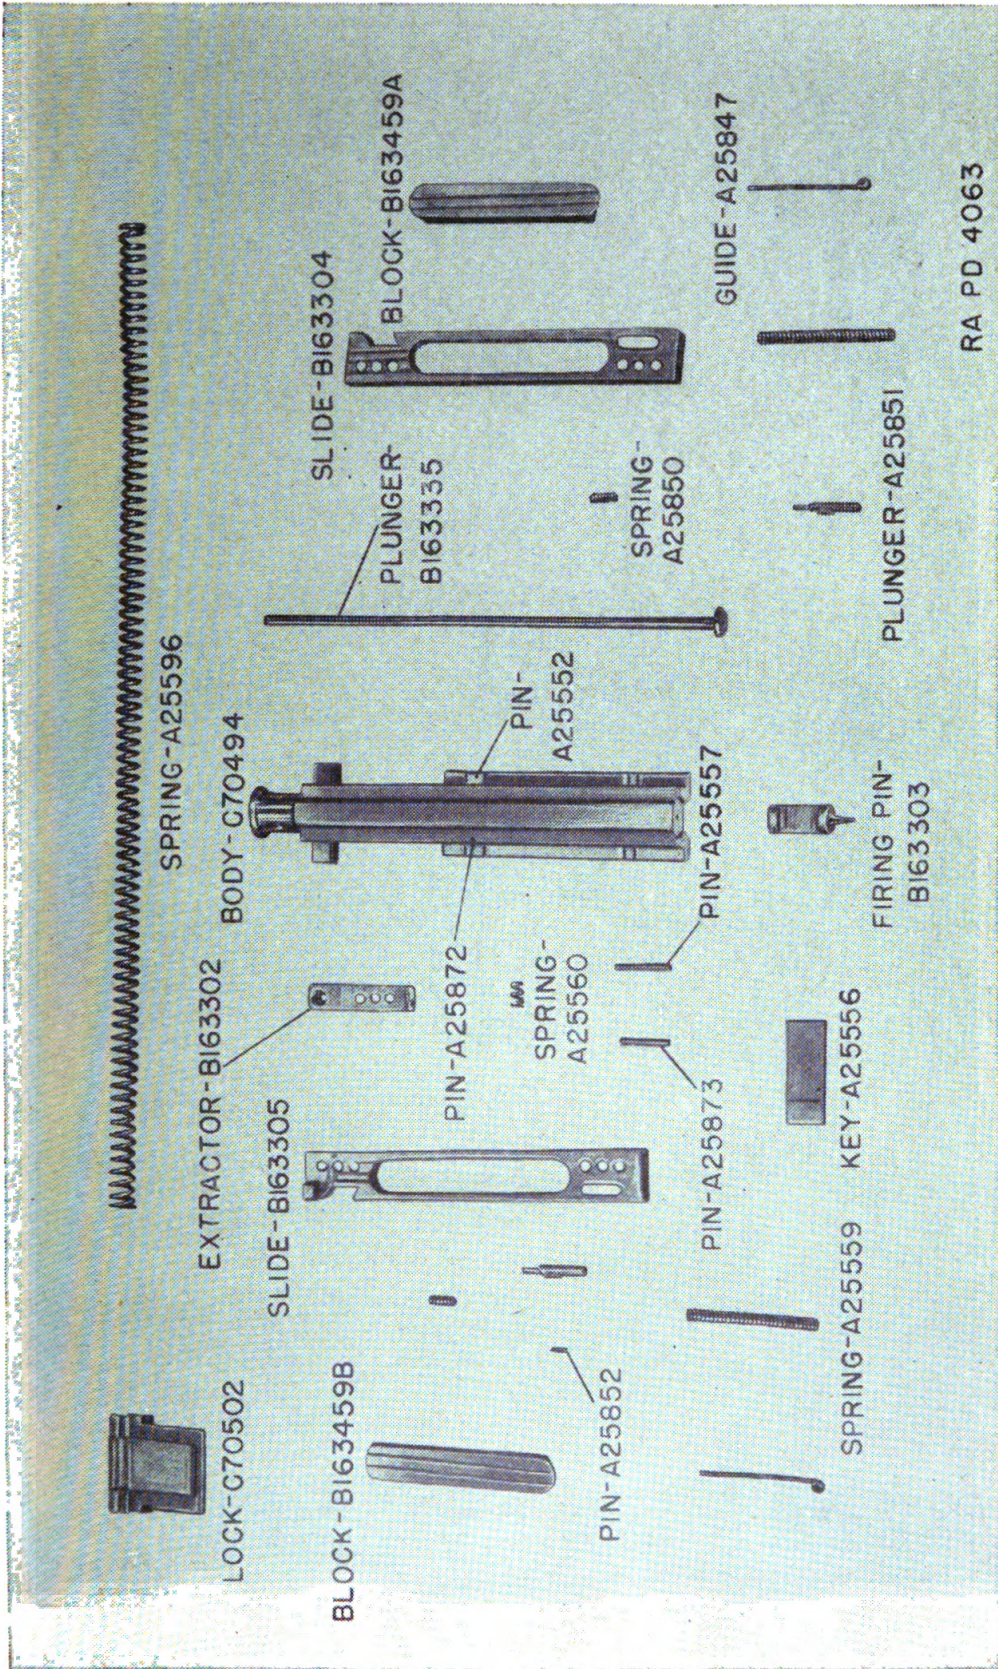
20-mm automatic gun M2, breechblock group parts.
